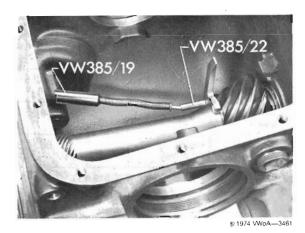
Setting gauge VW 385/22 in place on pinion face. This gauge compensates for hypoid off-
